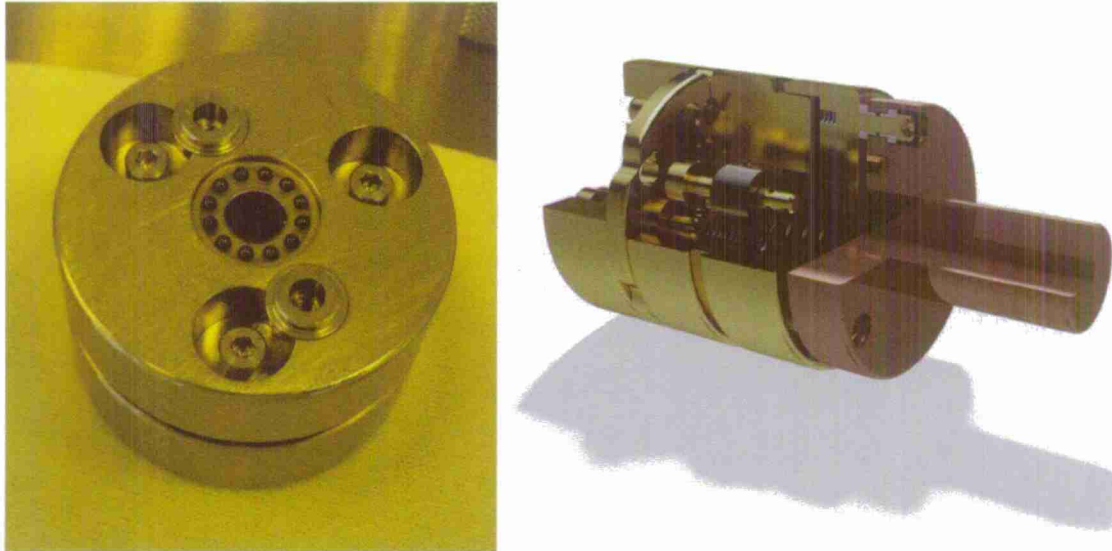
Cathode assembly flexure cam bearings (left), cathode assembly three quarter section (right).
